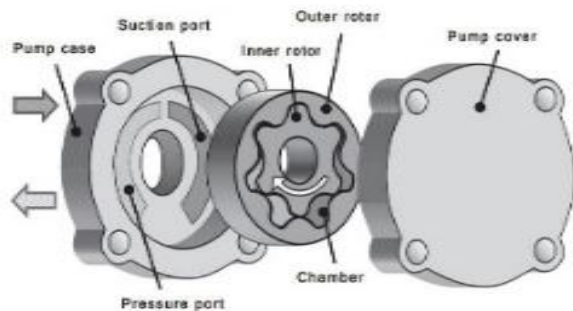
Rotor Fig. 1.11 Rotor Assembling M/c
